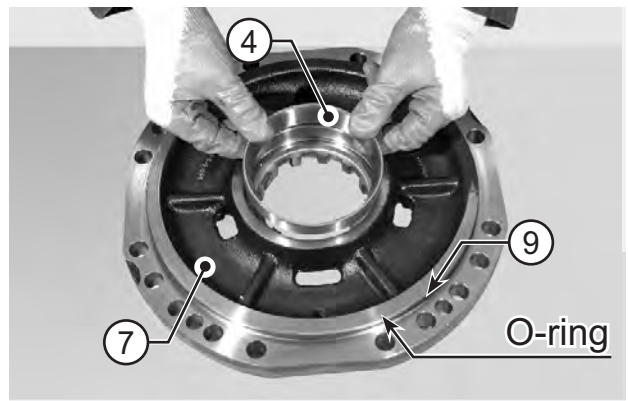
If the bearings need replacing, extract the external thrust blocks of the bearings (4) from middle cover (7).
